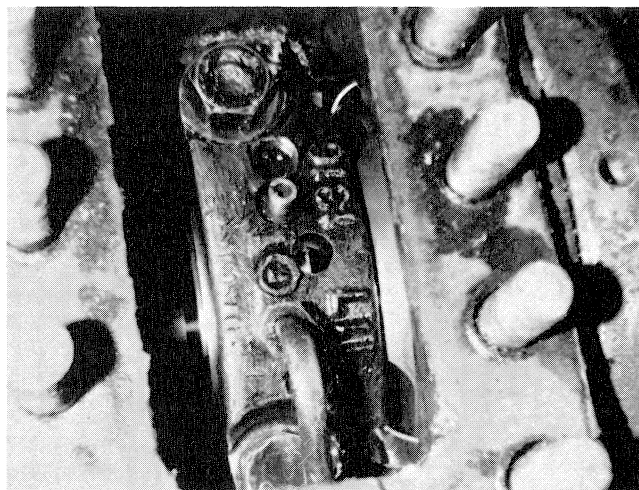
Top View of Discharge End Bearing Housing Showing Space Limitations.
